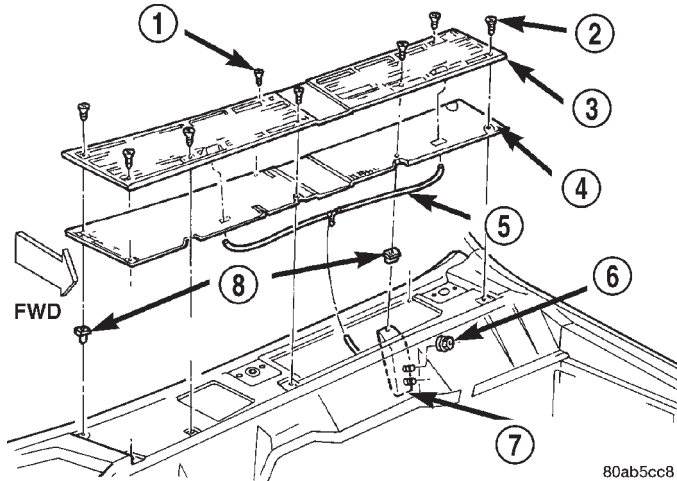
Cowl Plenum Cover/Grille Panel Remove/Install
